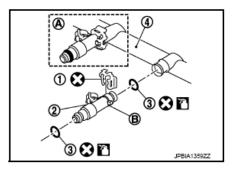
Identifying Fuel Injector, Fuel Tube, O-Ring And Clip Mounting Groove Courtesy of NISSAN NORTH AMERICA, INC.
